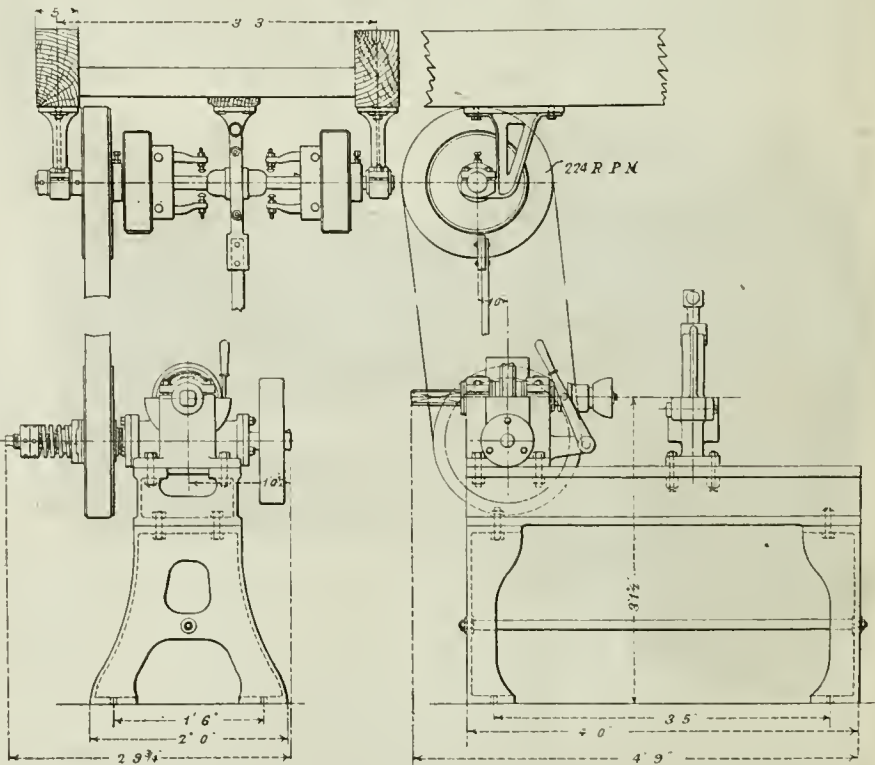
INSTALLATION DETAIL OF SHELL NOSE TIGHTENING MACHINE.
